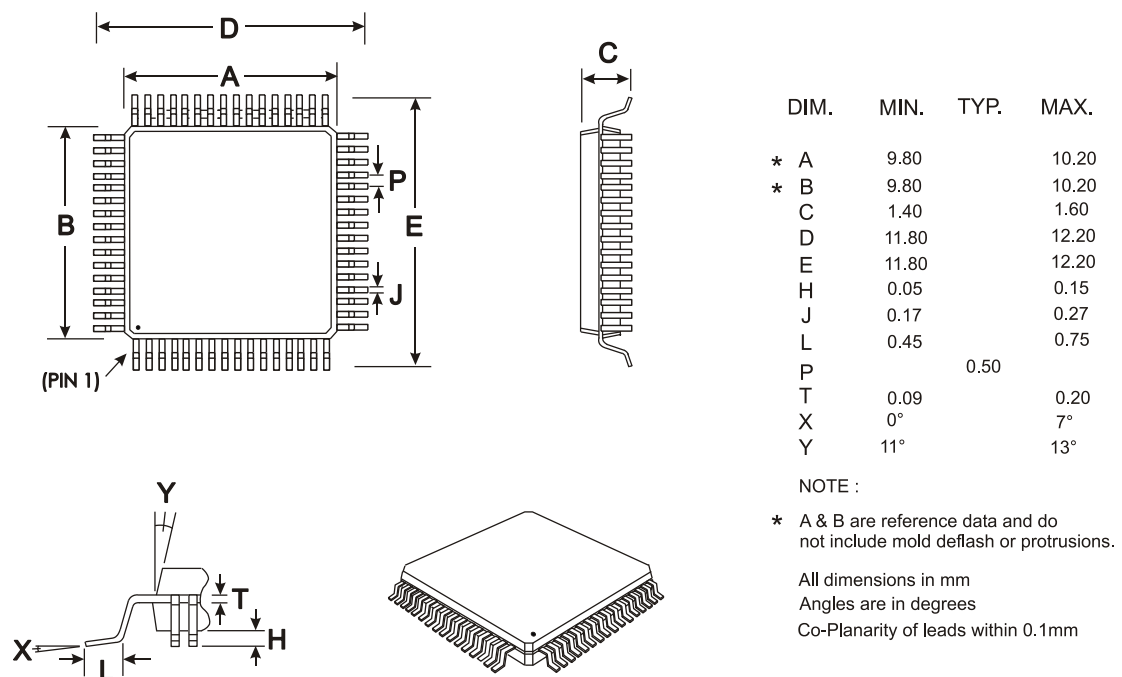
Mechanical outline for 64-pin LQFP (lead) package (L9)
